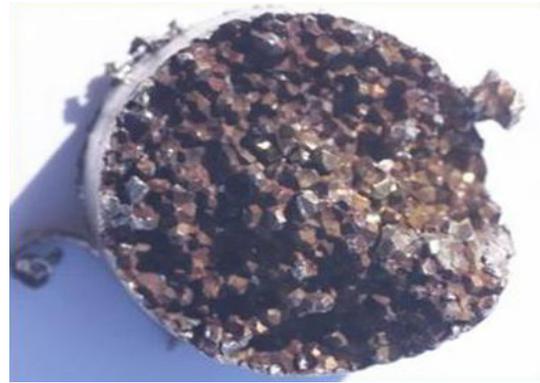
Photograph showing fracture surface having coarse granular texture with brownish red crystalloids.
